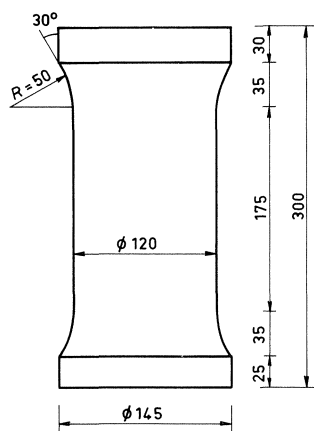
Shape and dimensions of the specimen for the concentric tensile tests.
